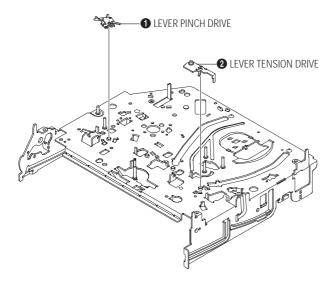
Lever Pinch Drive, Lever Tension Drive Removal
